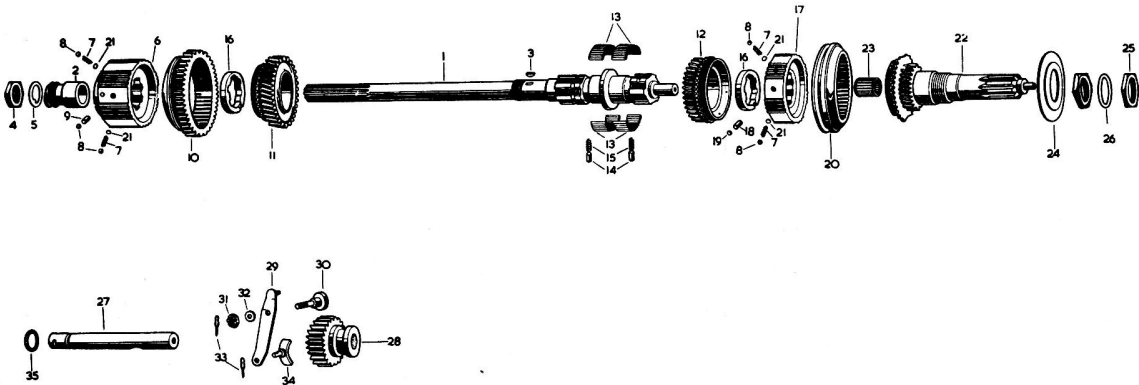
THE GEARS, 'GB' BOXES WITH 'JS' SUFFIX
